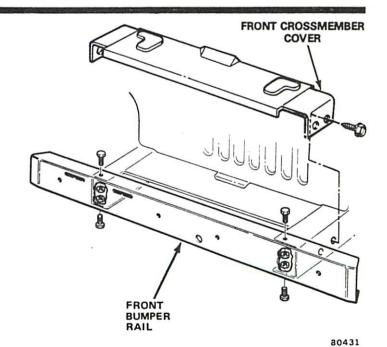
F-18 Front Bumper—CJ and Scrambler Models
